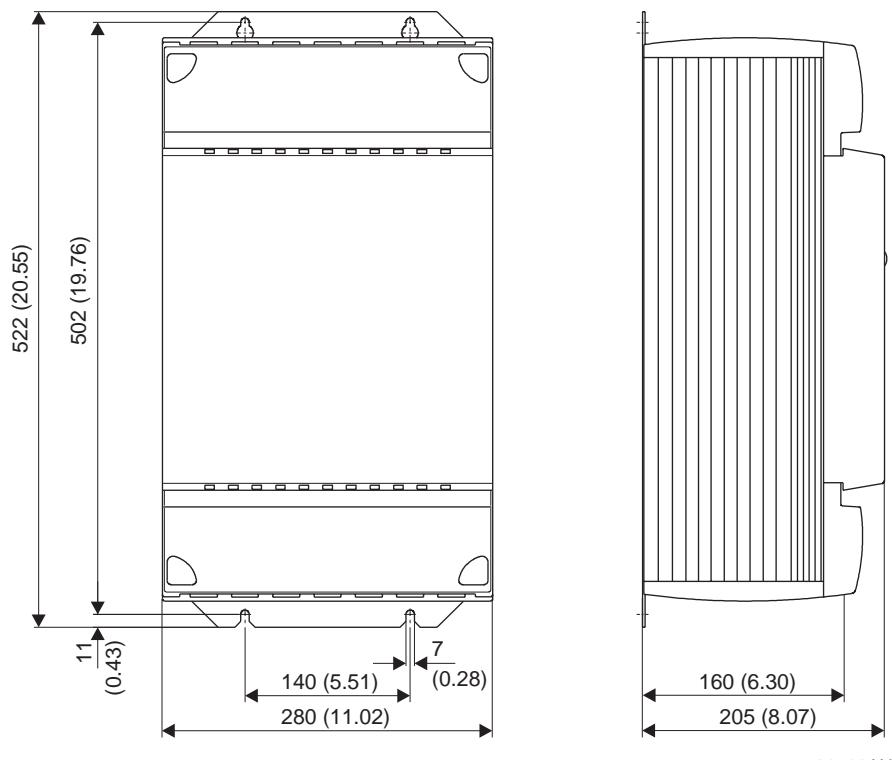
Dimensions, MDR60A size 4, in mm (in)
